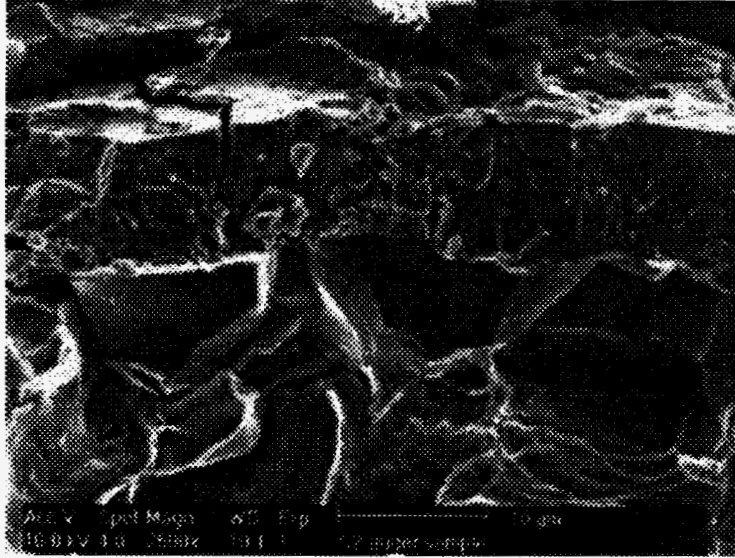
Intergranular fracture underneath the Zn coating in specimen S2 fracture in-situe in Auger.
